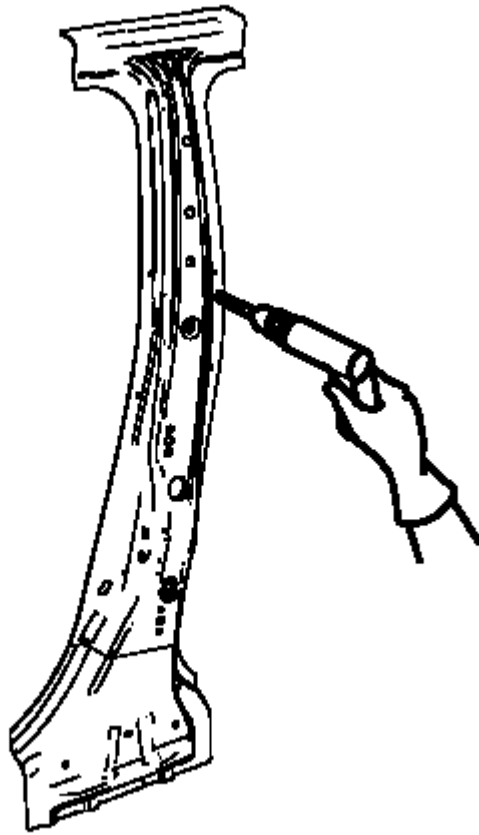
Drilling 8 mm (5/16 in) For Plug Welding Along Edges Of Body Lock Pillar Outer Panel Reinforcement
